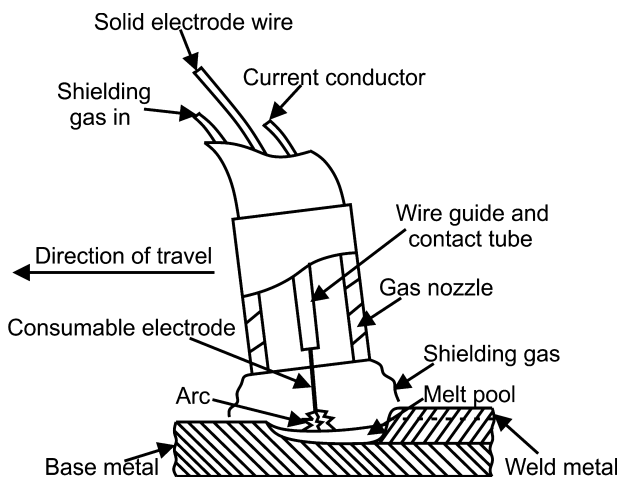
Schematic of gas metal arc welding (GMAW) process [4].
